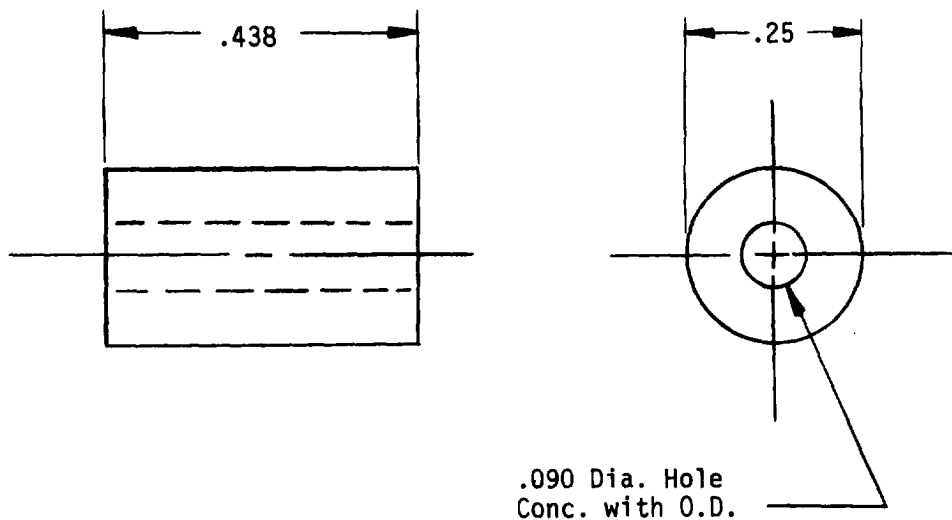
LOWER CUTTER INSTL. - SHEET 2 OF 3
